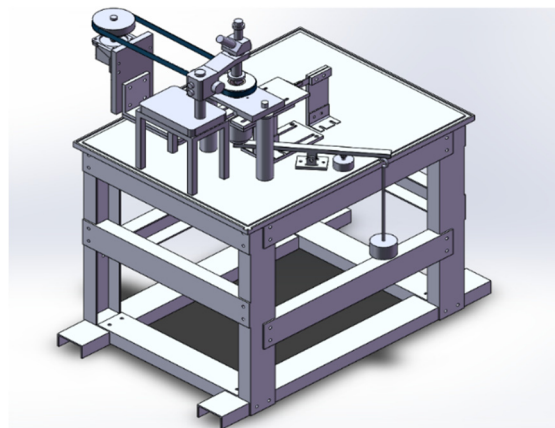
Observation Machine of the Contact Surface in Bearing
